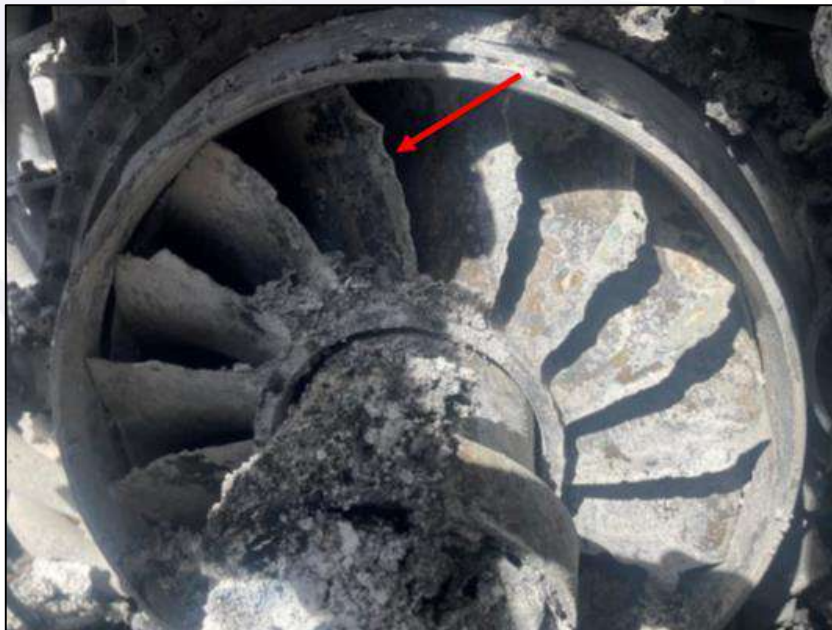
Image of the LPC rotor of engine No. 2. Red arrow indicating blade deformation in the direction opposite to the rotation of the rotor shaft.
